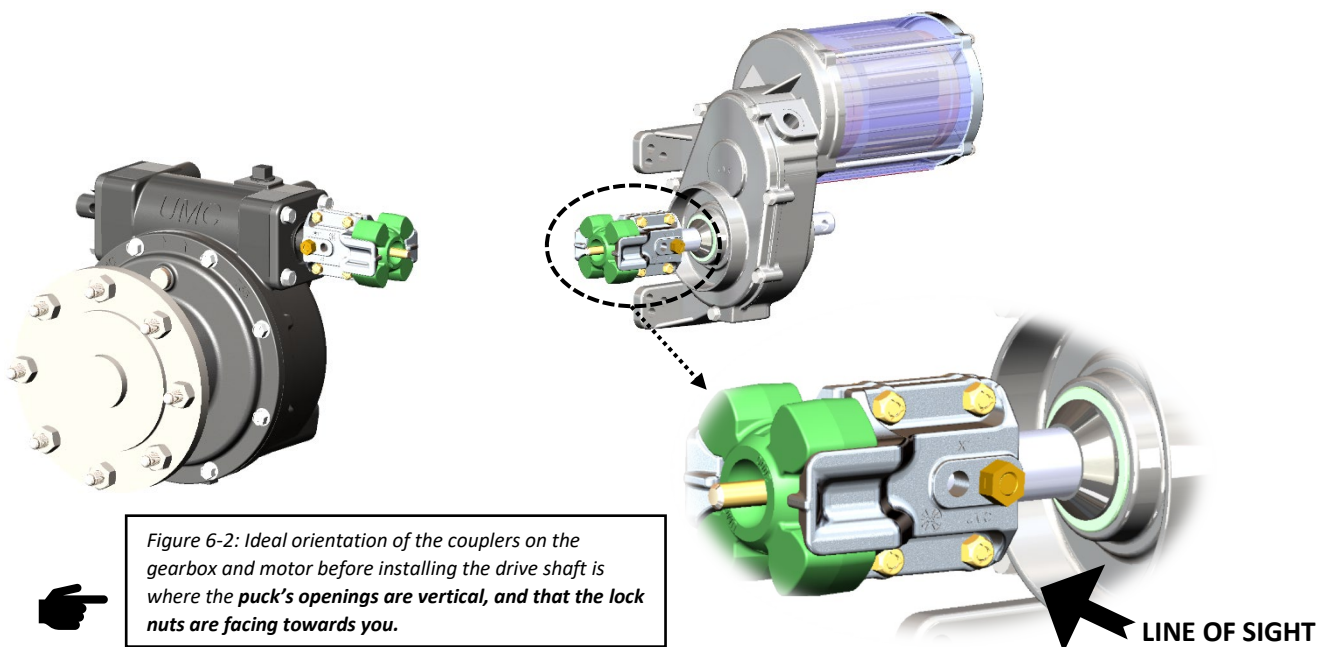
Ideal orientation of the couplers on the gearbox and motor before installing the drive shaft is where the puck's openings are vertical, and that the lock nuts are facing towards you.
